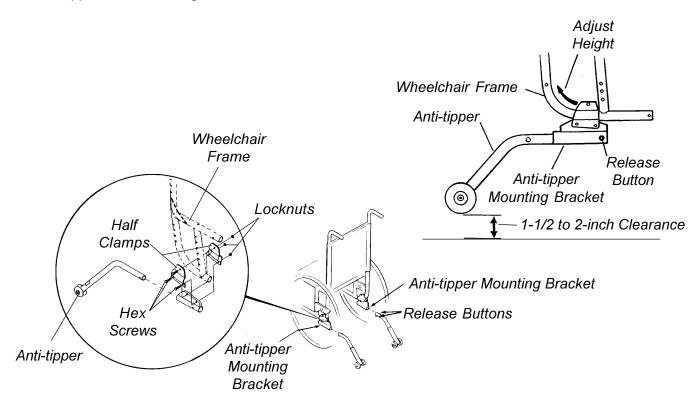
INSTALLING/ADJUSTING THE ANTI-TIPPERS
